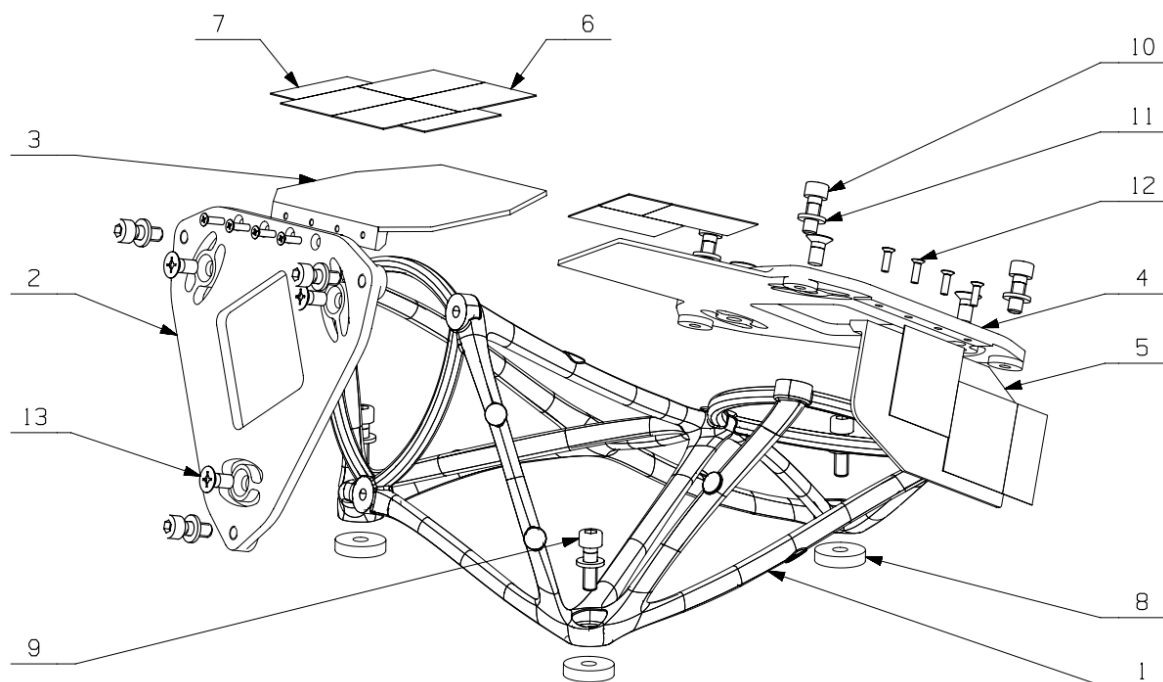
Final design of the Star Tracker Bracket – exploded view
